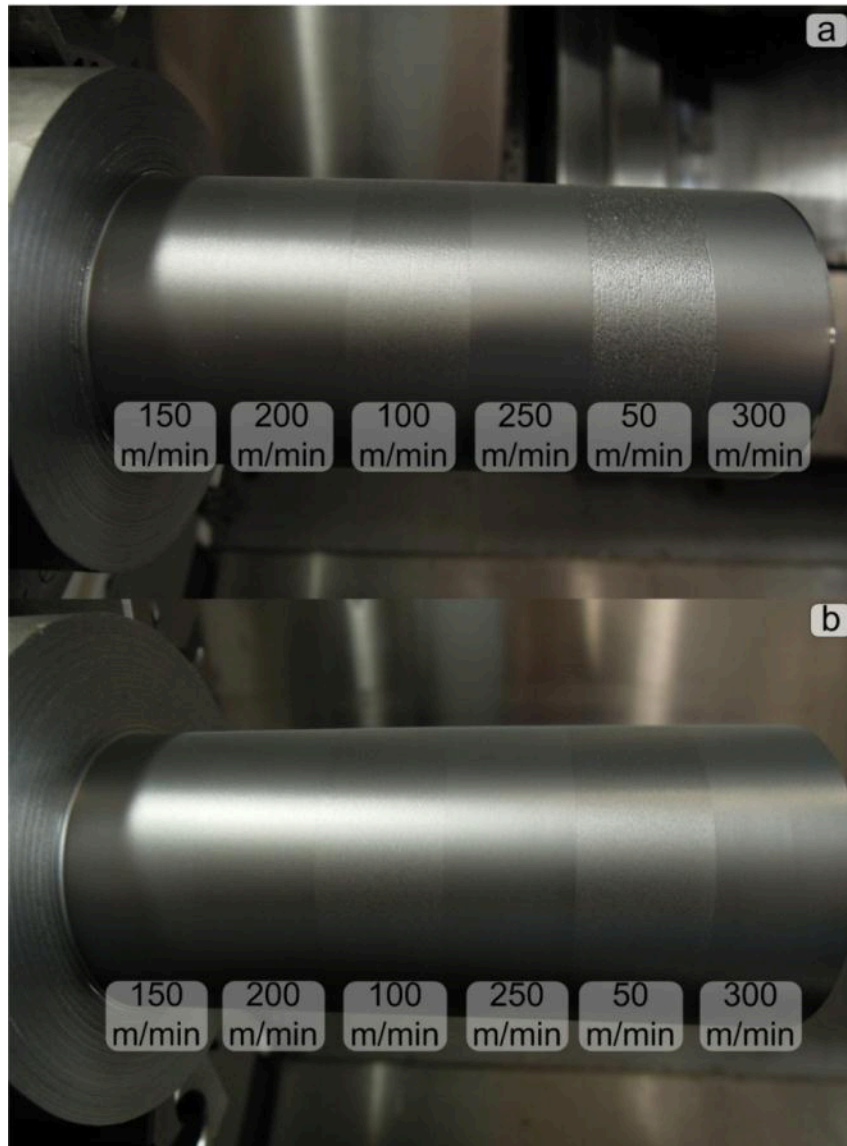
Machined surface at various cutting speeds v_c for negative basic-shape cutting tool WCN8 (a) and positive basic-shape cutting tool WCP4 (b) ($f=0,11$ mm/rev, $a_p=0,3$ mm)
